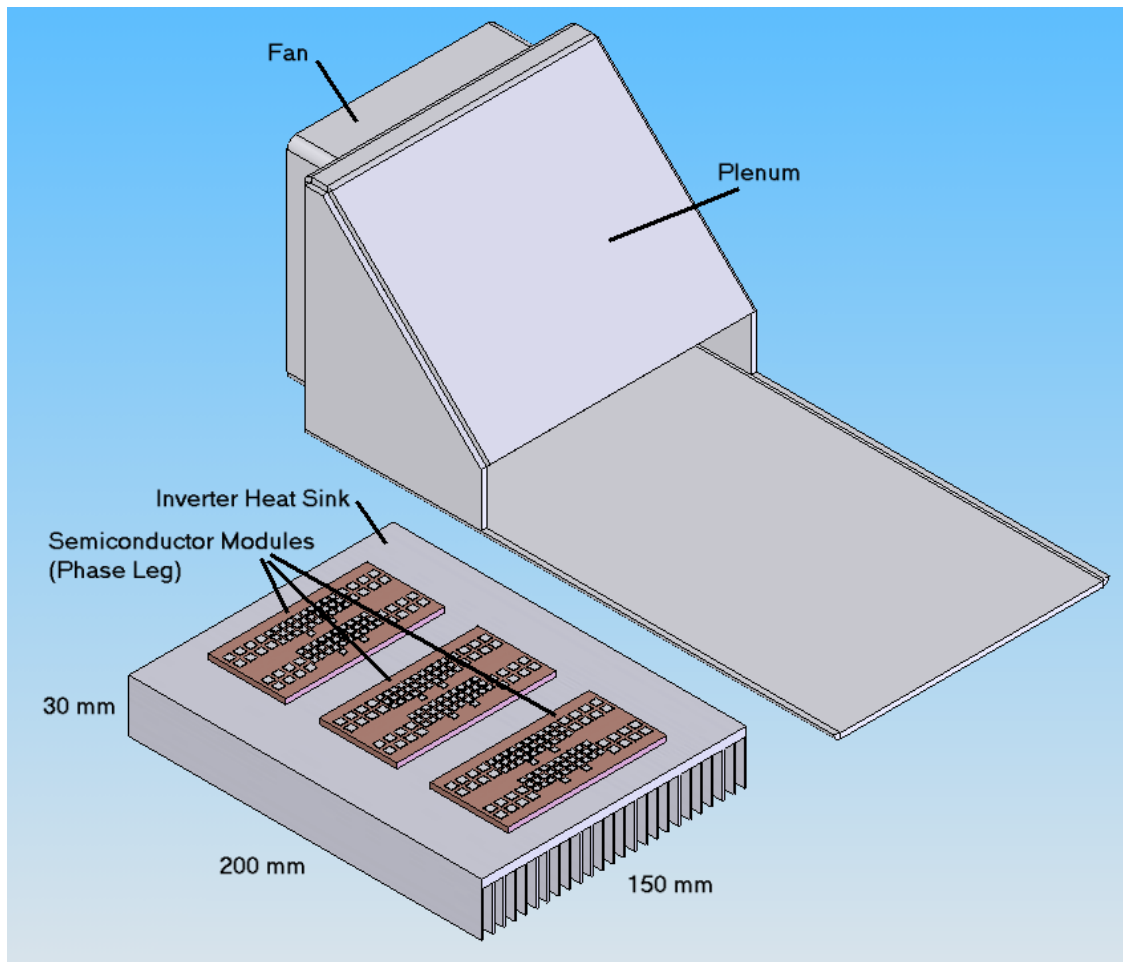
Exploded View of SiC BJT Inverter at 275°C, with Cooling Equipment
